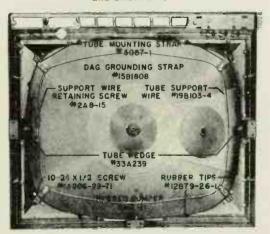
Rear View of Escutcheon and Picture Tube Mounting In Later Sets With Picture Tube Dag Graunded ta Chassis.
